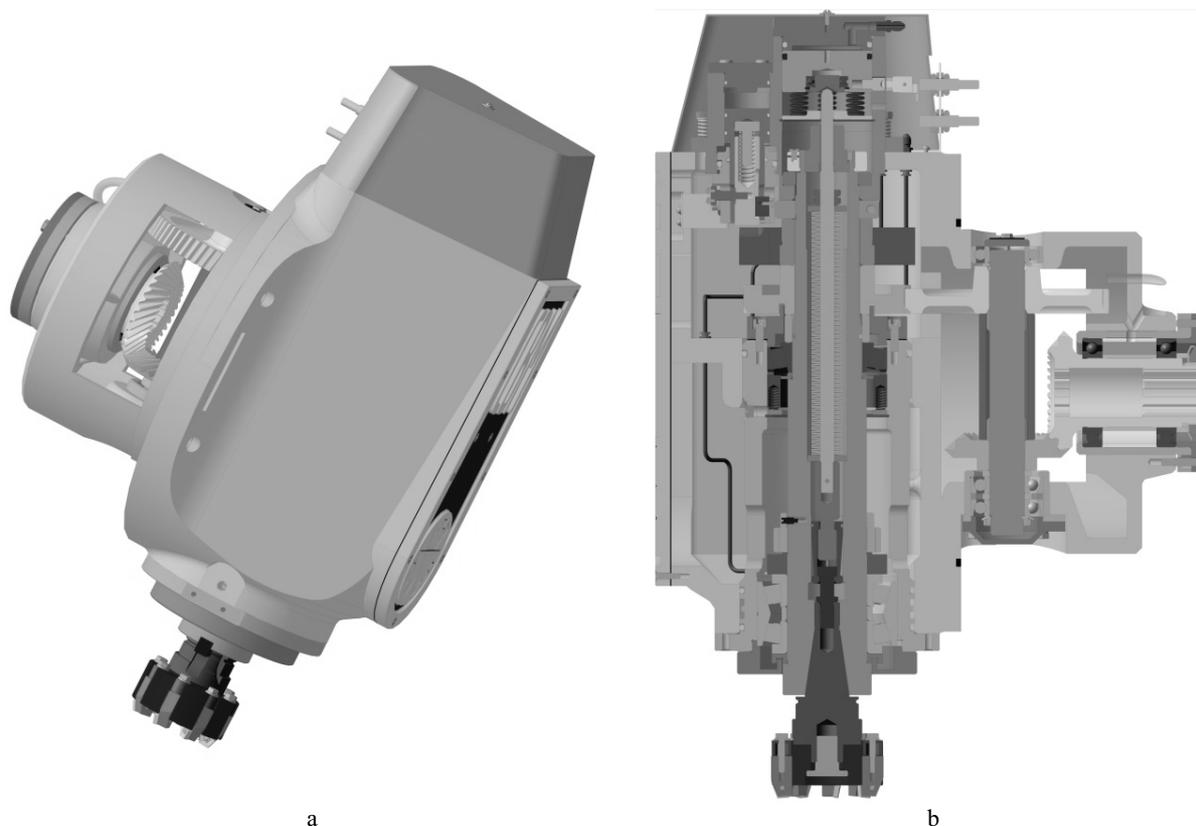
Spindle's head machining centre SVM1F4: a – general view of unit; b – cross-section of head
